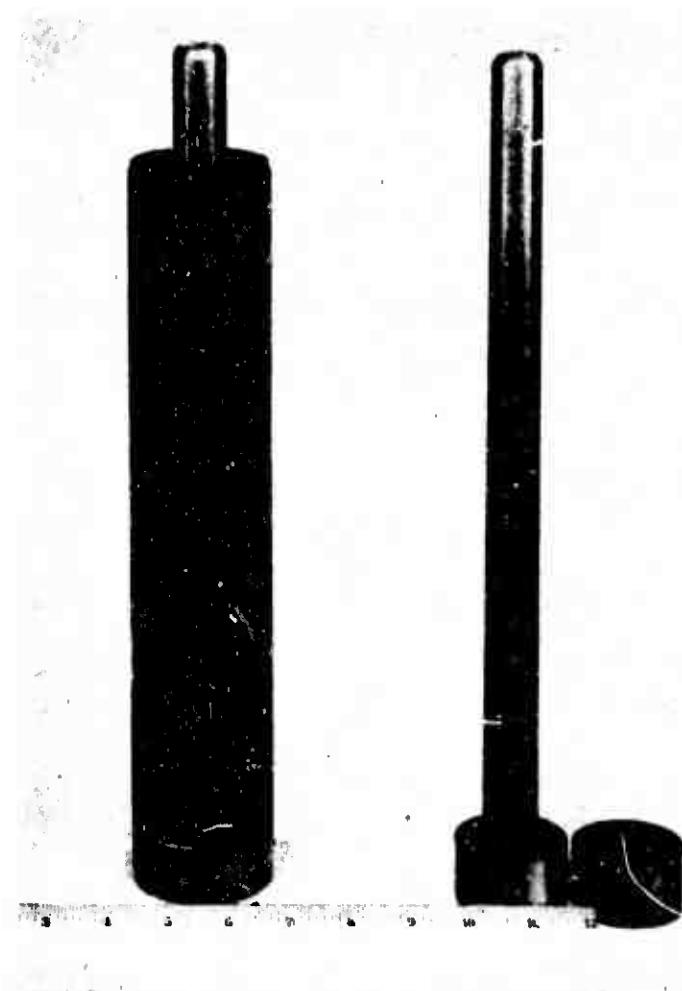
MOTOR MOLD USED FOR FABRICATION OF PERFORATED GRAINS
